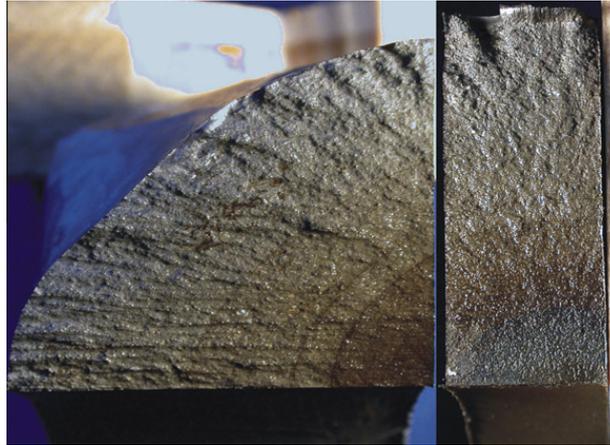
Surface of first fatigue crack, after cryogenic opening and cleaning, note initiation from inner surface (bottom of photo).
